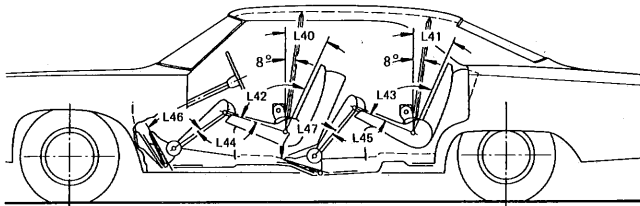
INTERIOR DIMENSIONS, LENGTH
